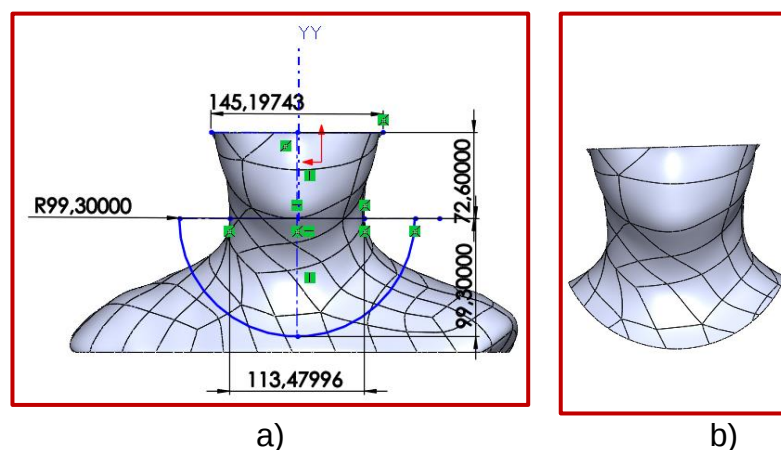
Double Figure of the Sketch Scheme for the Cutting in the Frontal View with the dimensions of the volunteer C: a) Sketch and Dimensions of the volunteer C; b) Final cut of in the Frontal View.
